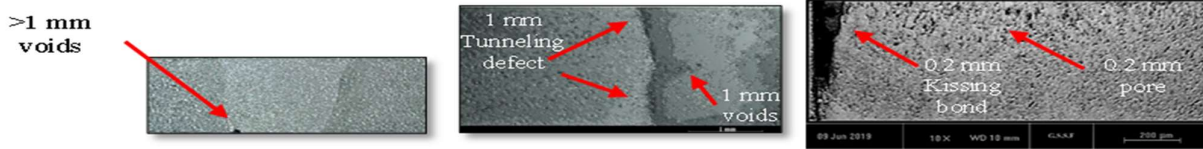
Macro/Micrographs of the surface of friction stir welding sample for cylindrical pin profile (run # 21).
